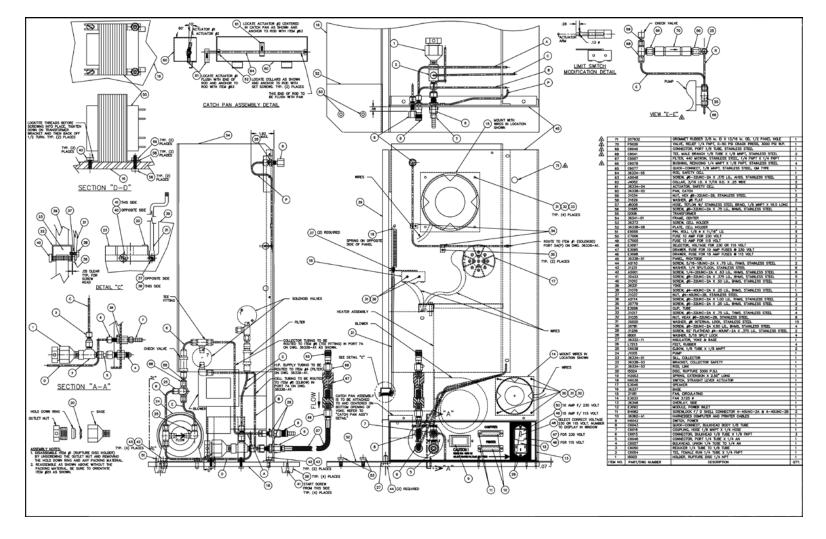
Base & Right Side Panel Assembly, Rev H
